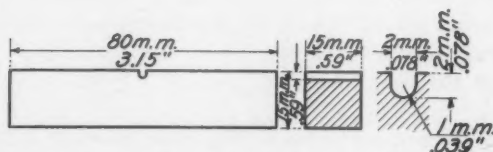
MODIFIED CHARPY SPECIMEN USED FOR IMPACT TESTS.
